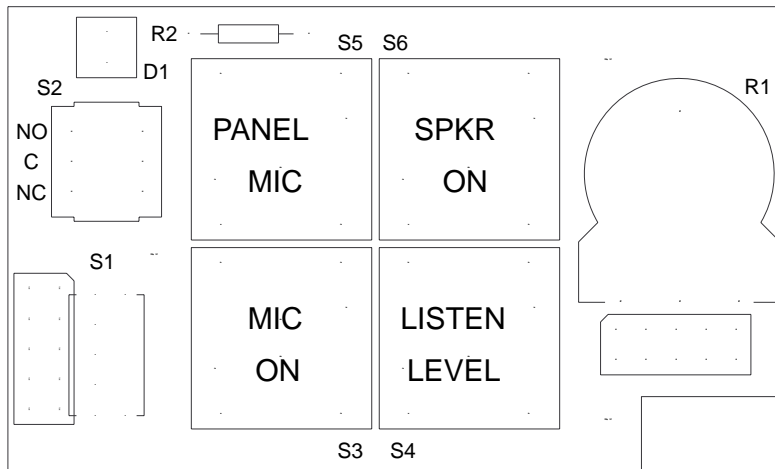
Assembly Drawing—ICS-92/92T Function Switch PCB Rev. C
